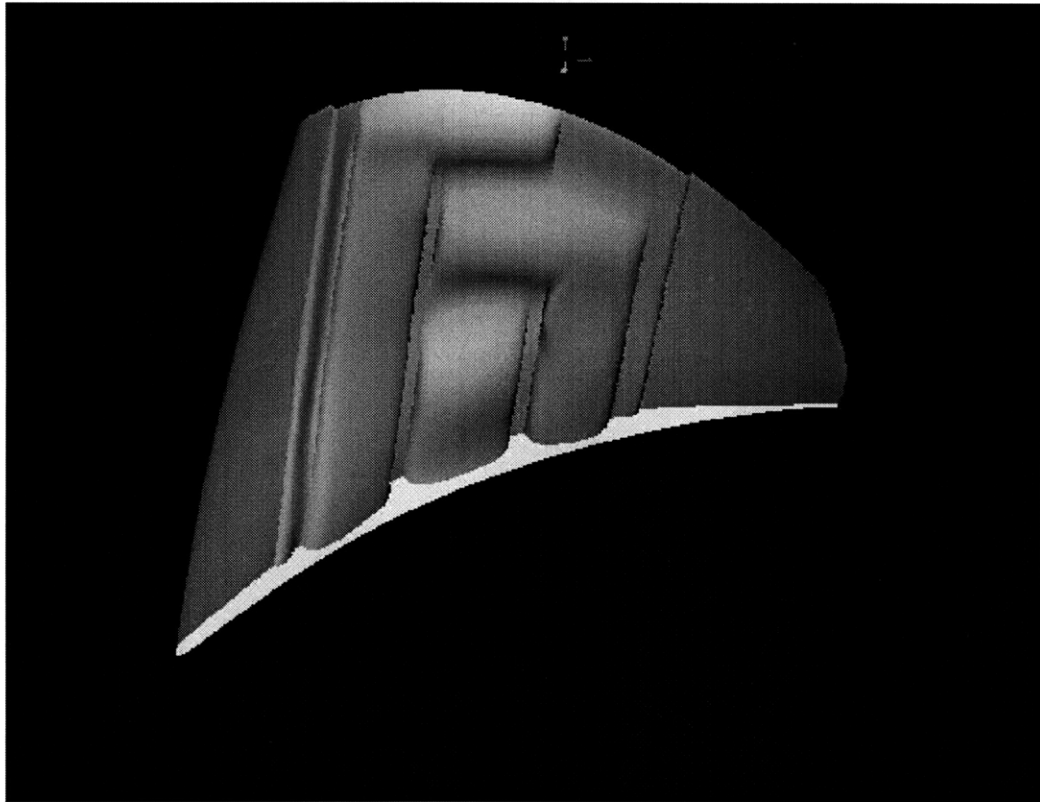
Three Dimensional Rotor Blade with Suction Channels
